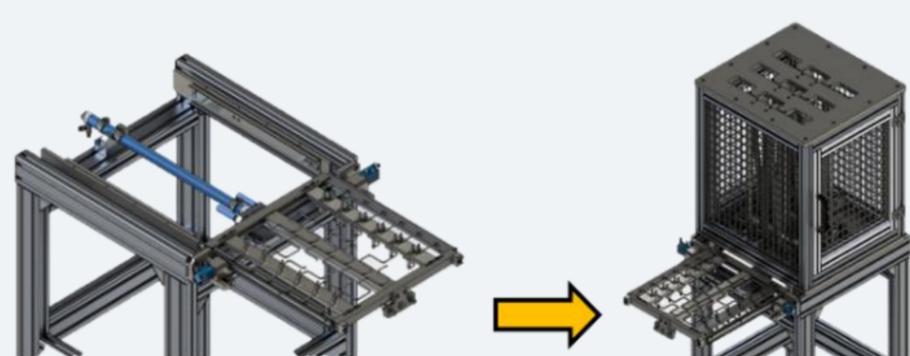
wires storage tower (right hand) and movable drawer (left hand)
